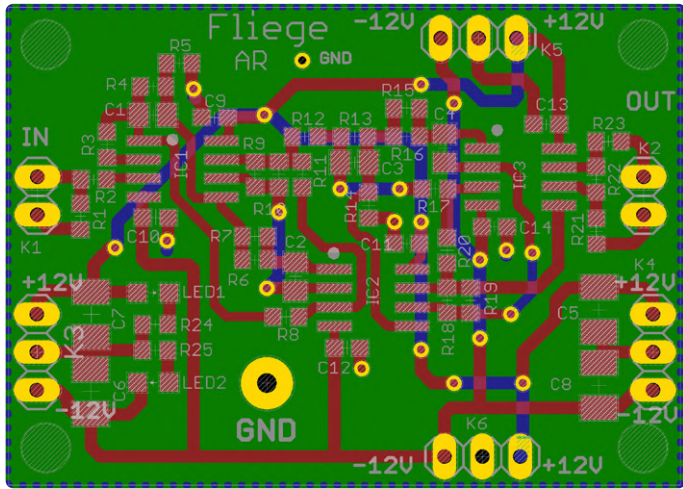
The PCB layout is designed for SMD components, but they are large enough to make manual soldering possible.
